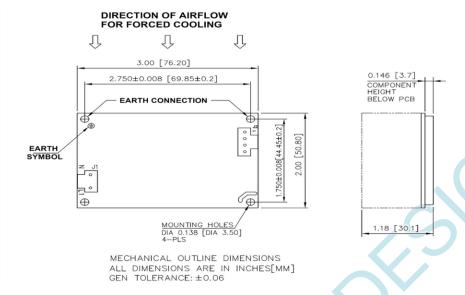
Mechanical Drawing - Molex Header (Option 2)
